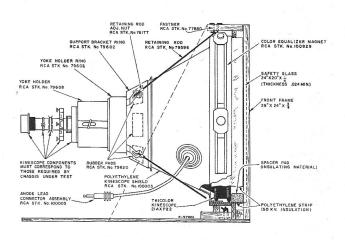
AXP22 Tri-Color Kinescope Test Jig-Assembly
